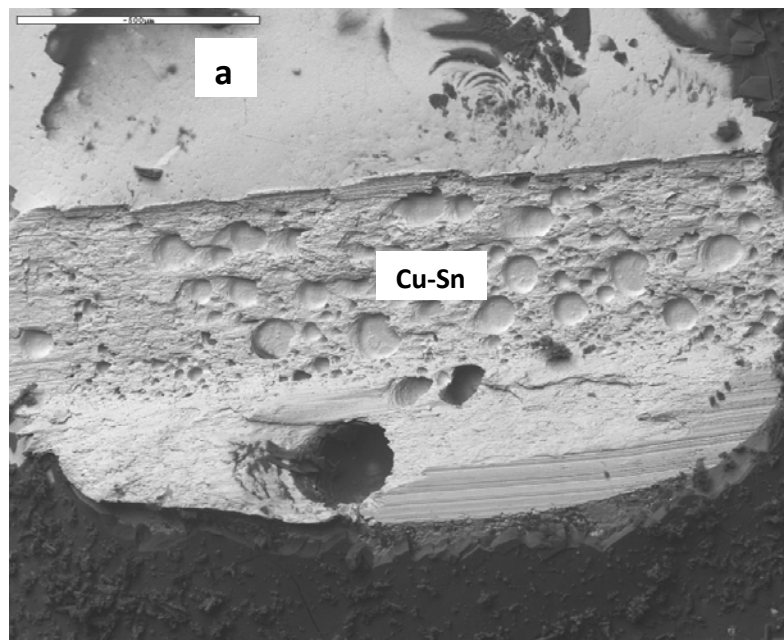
Fracture surface of the interface formed between Sn-3.8Ag-0.7Cu solder alloy and component at 100hours of isothermal ageing.
